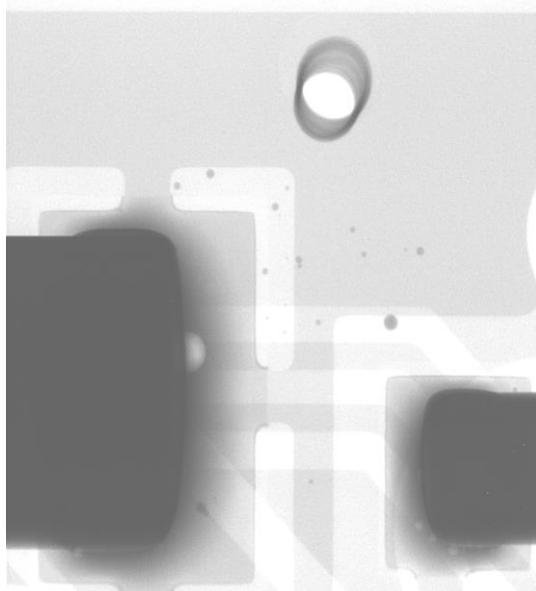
X-ray image showing reflowed solder with solder splatter.
